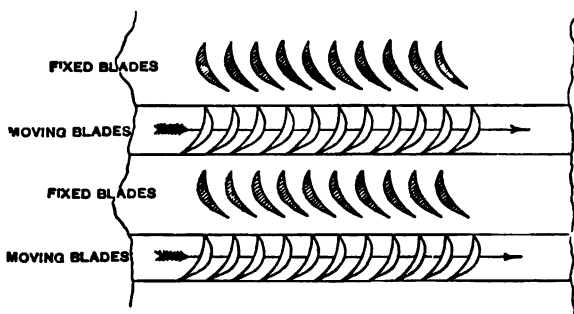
Arrangement of Blades in Parsons' Steam Turbine.
